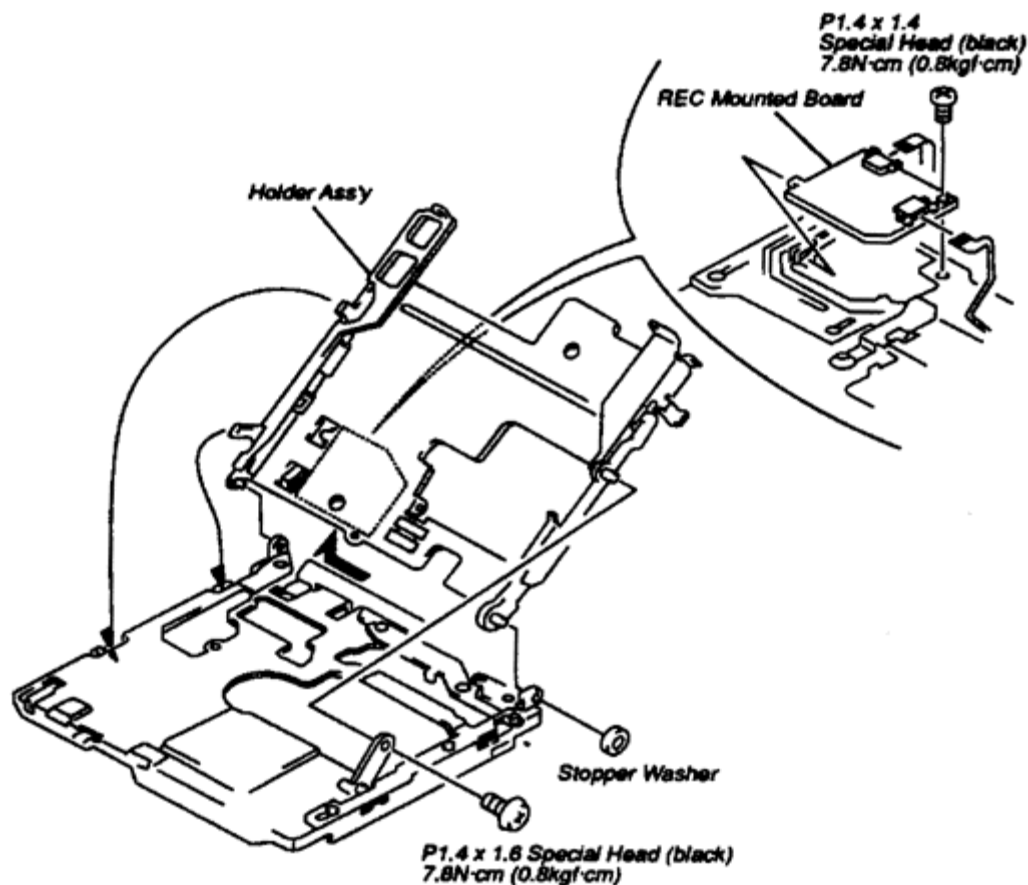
(f) Holder Ass'y and REC Mounted Board Replacement
